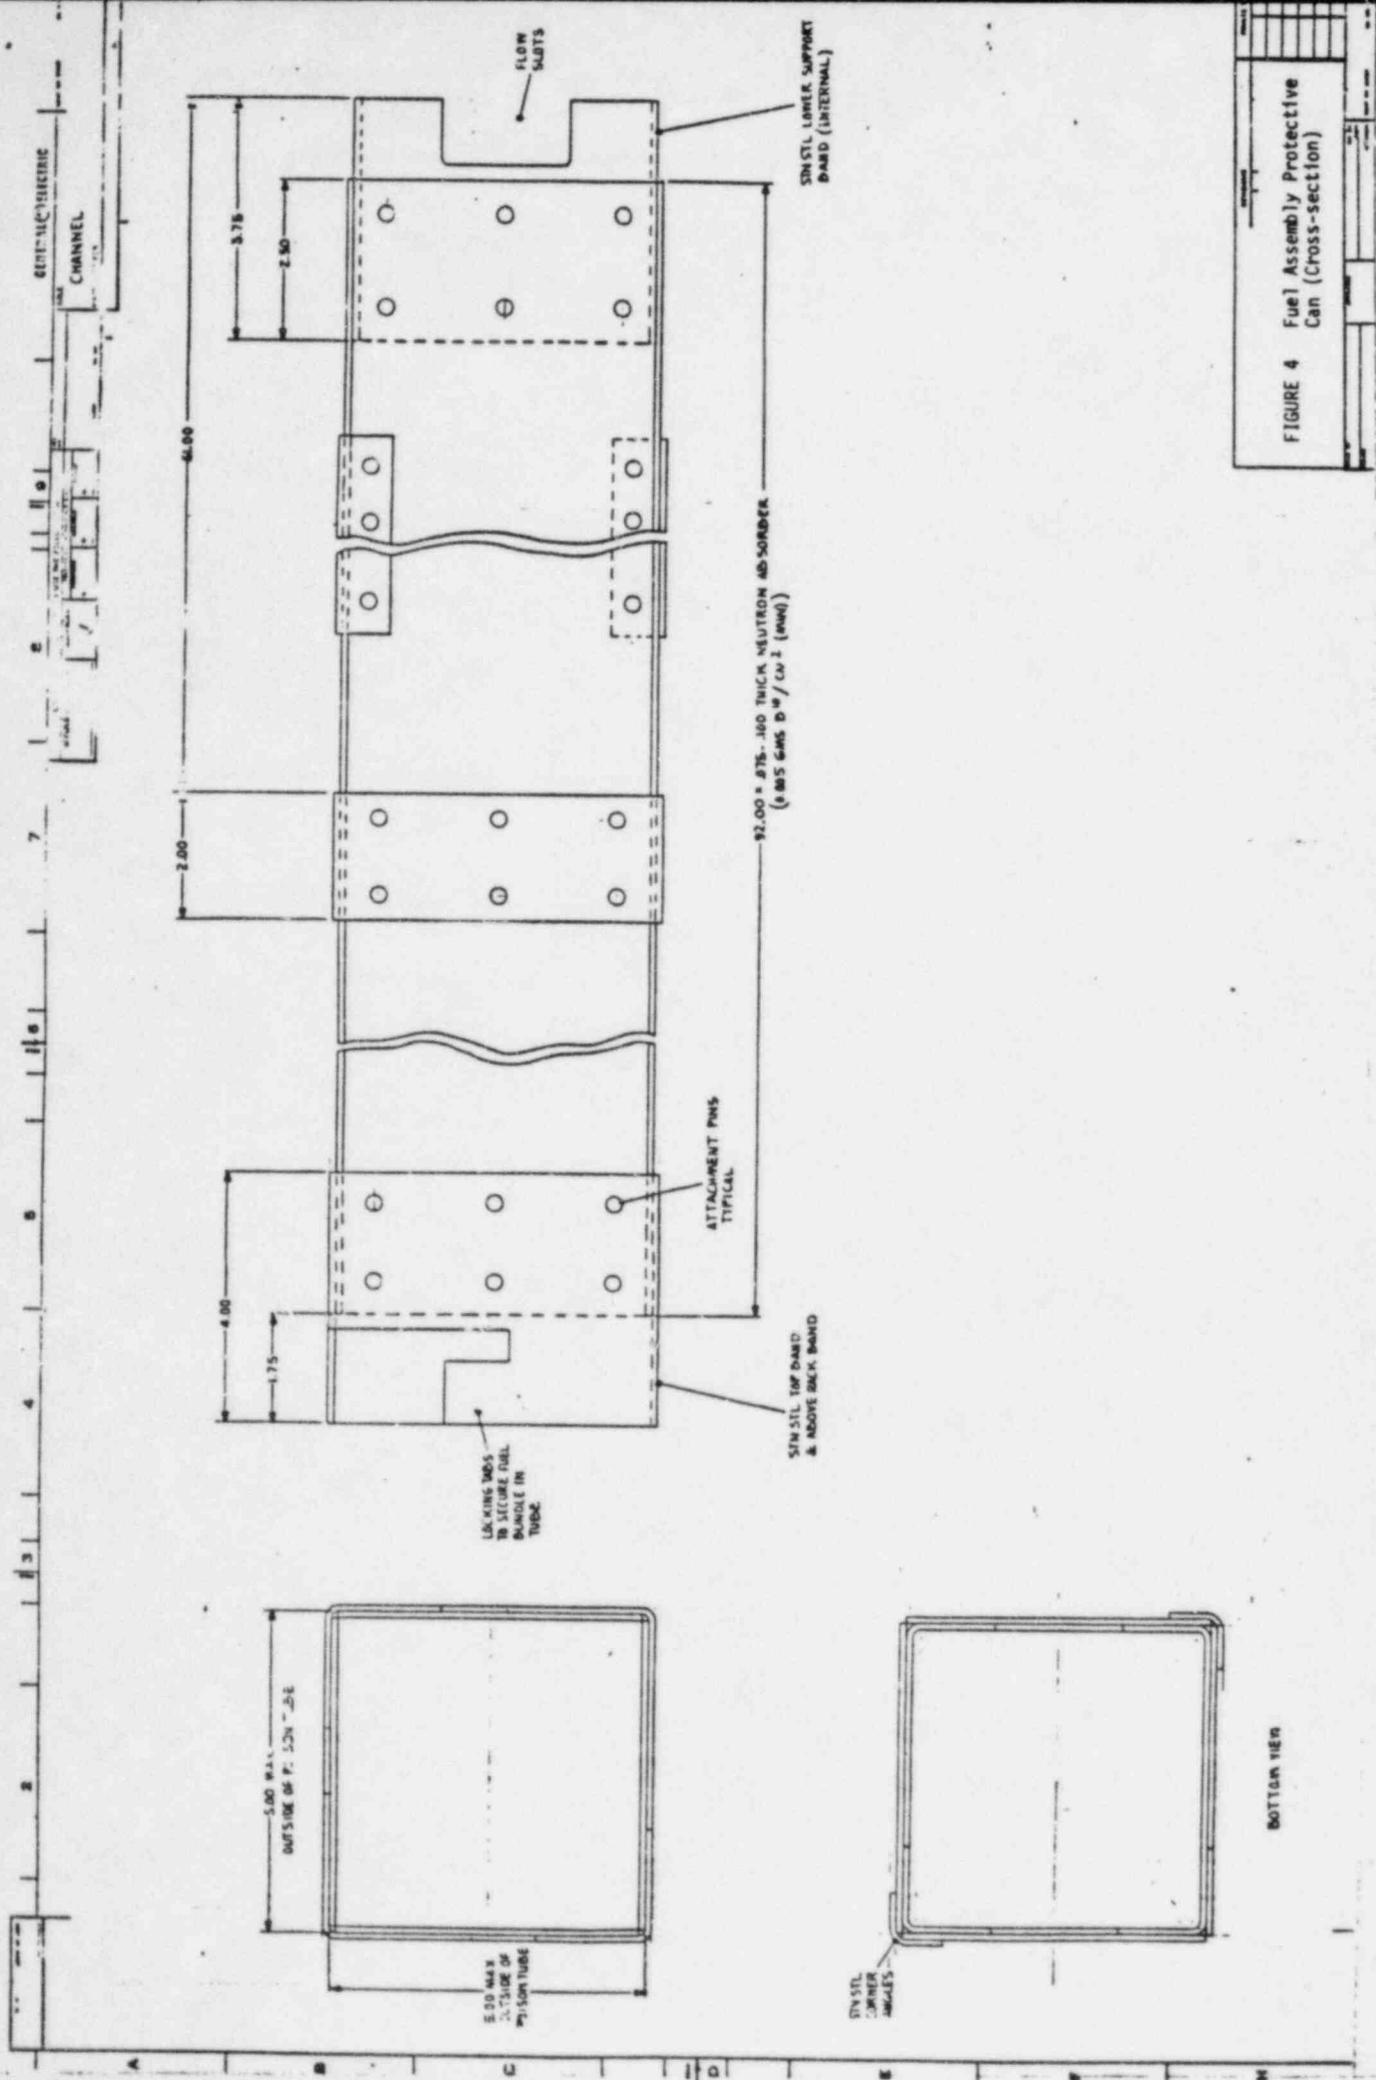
Fuel Assembly Protective Can (Cross-section)
